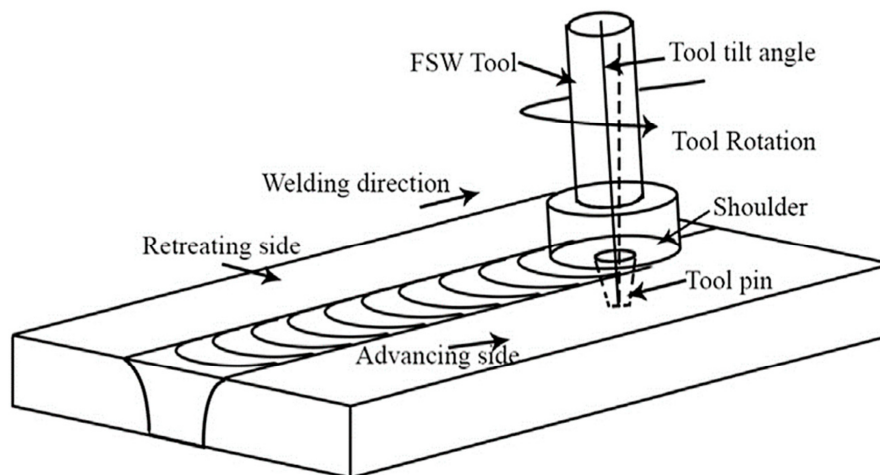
Schematic of the FSW Process (Conventional or Butt welding technique) [3]
